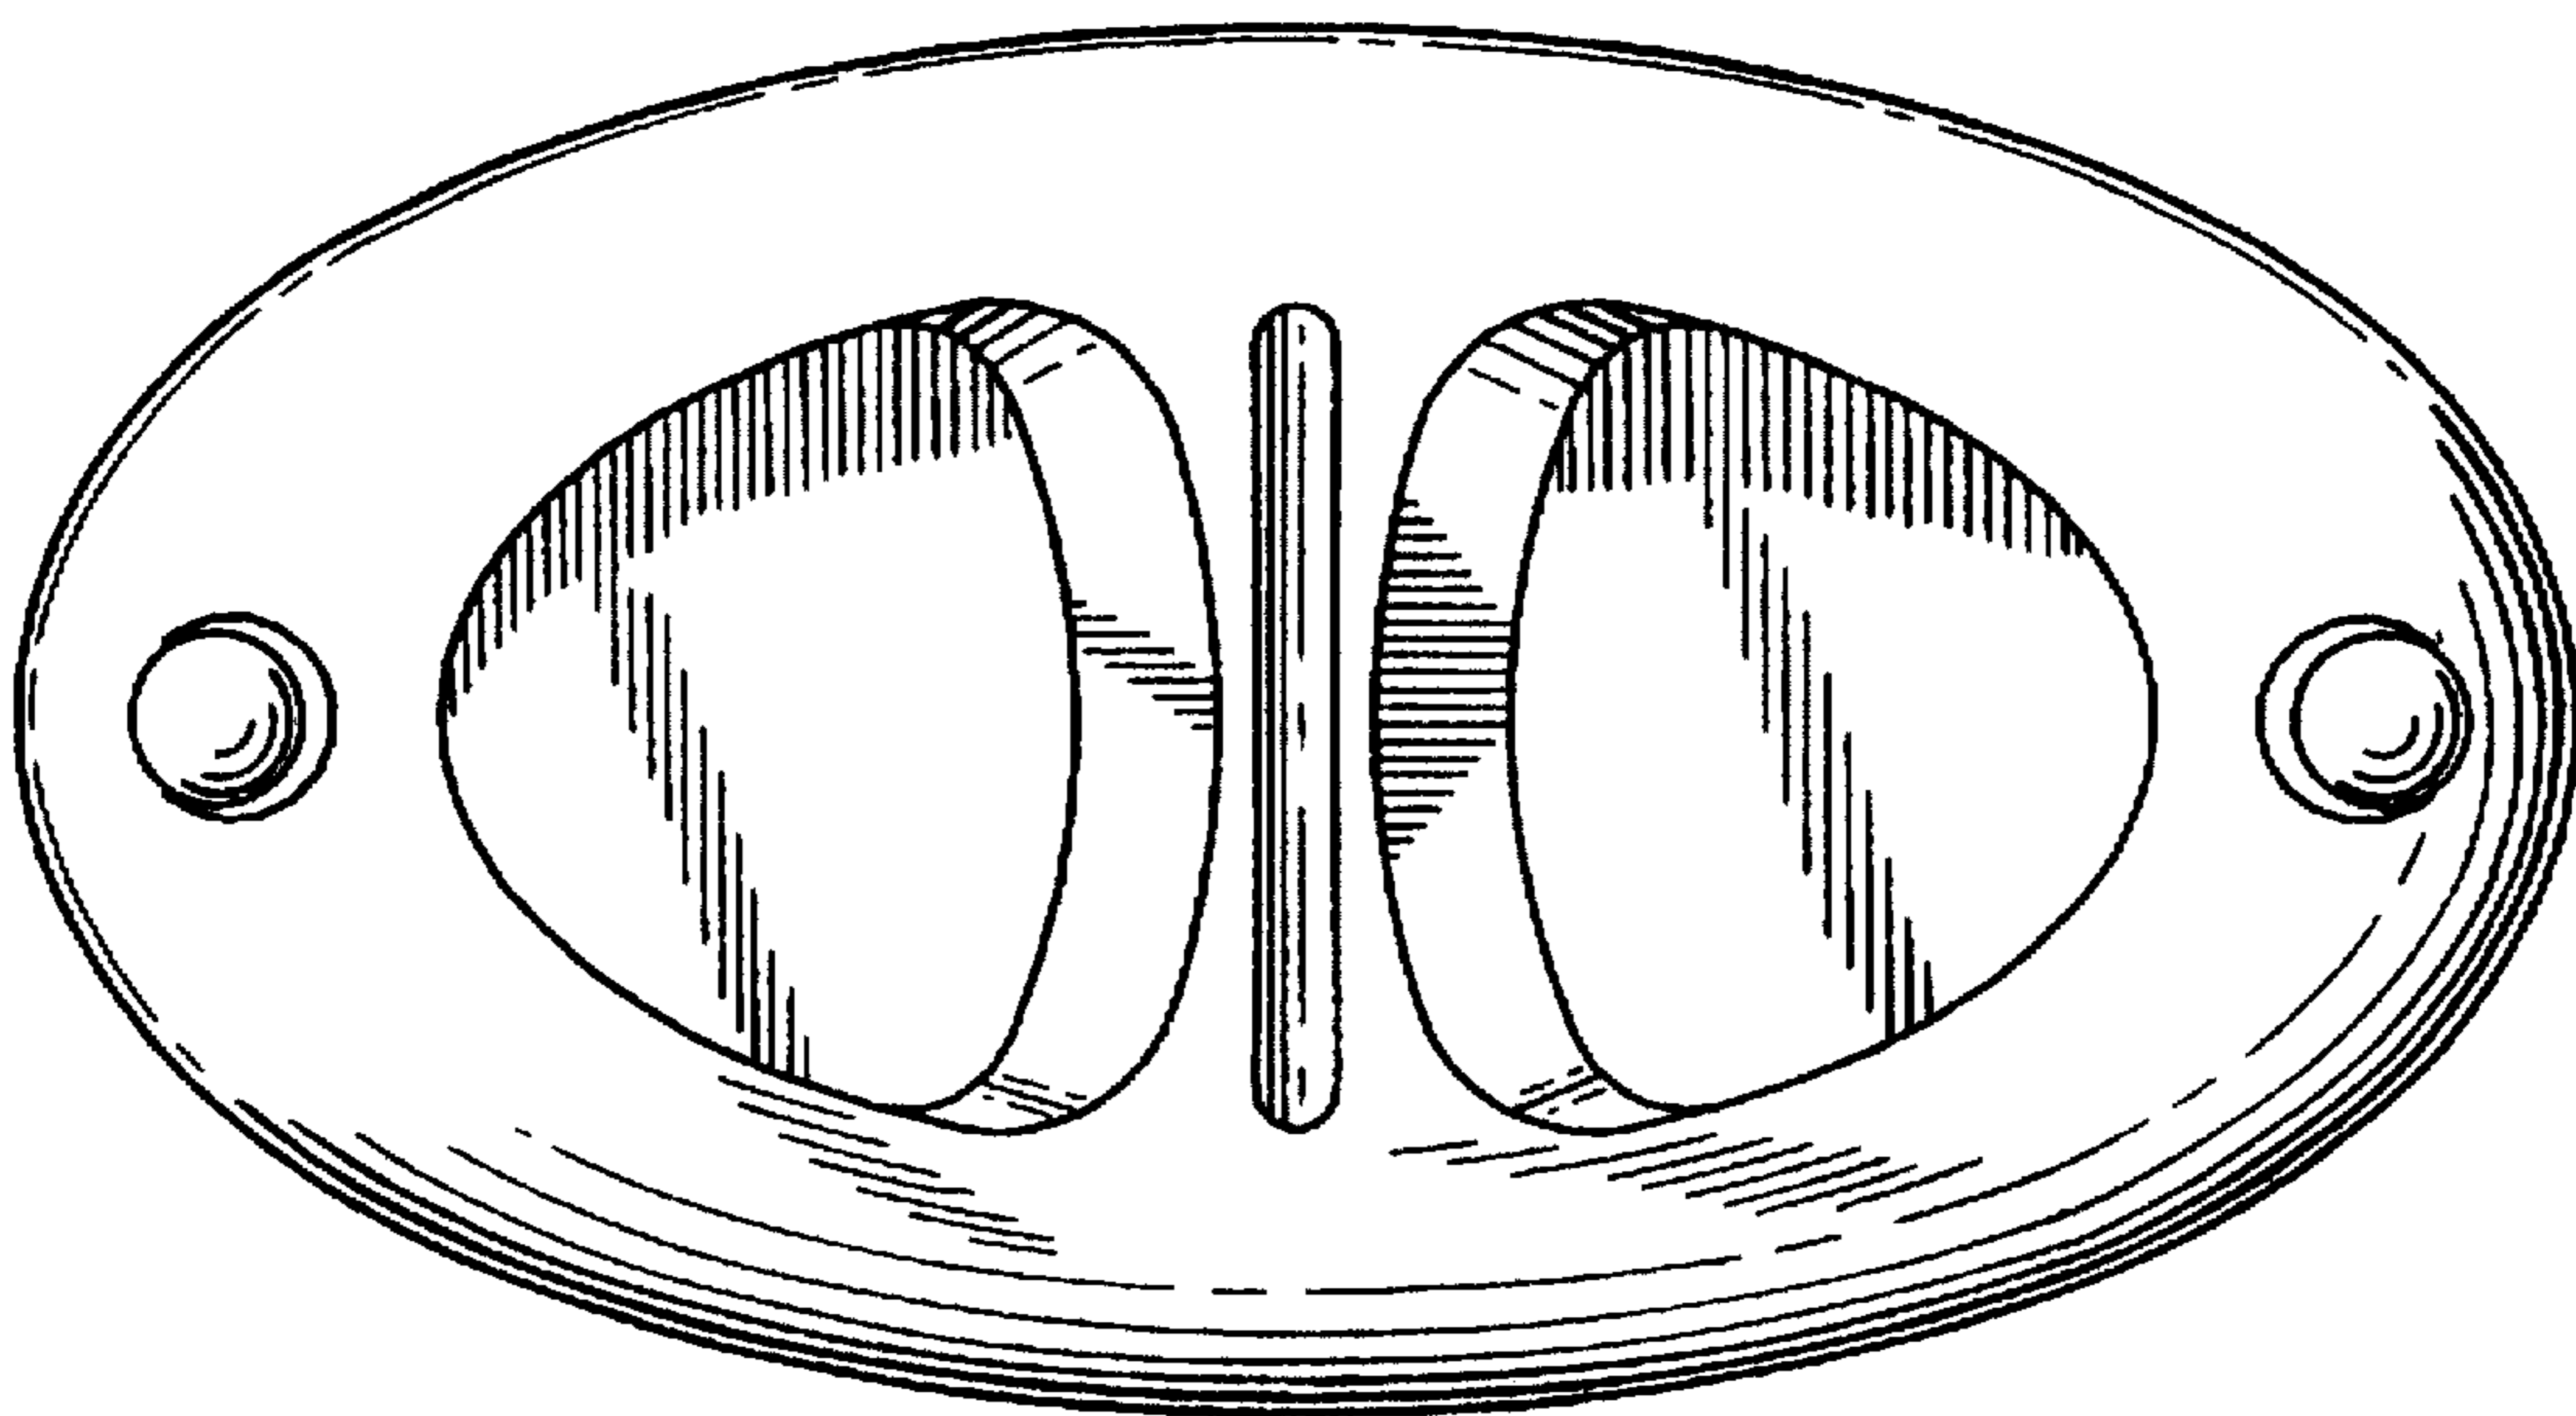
is an isometric view of a sheet dispenser showing our new design;
